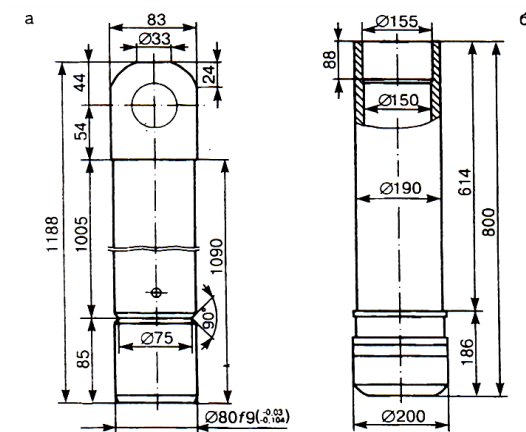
Rod (a) and plunger (b) of cargo-lifting equipment
